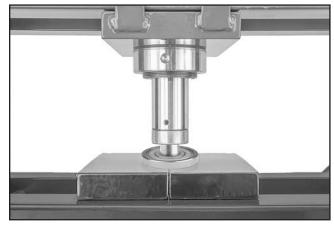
Example of typical hydraulic press operation using V-blocks on press bed.
